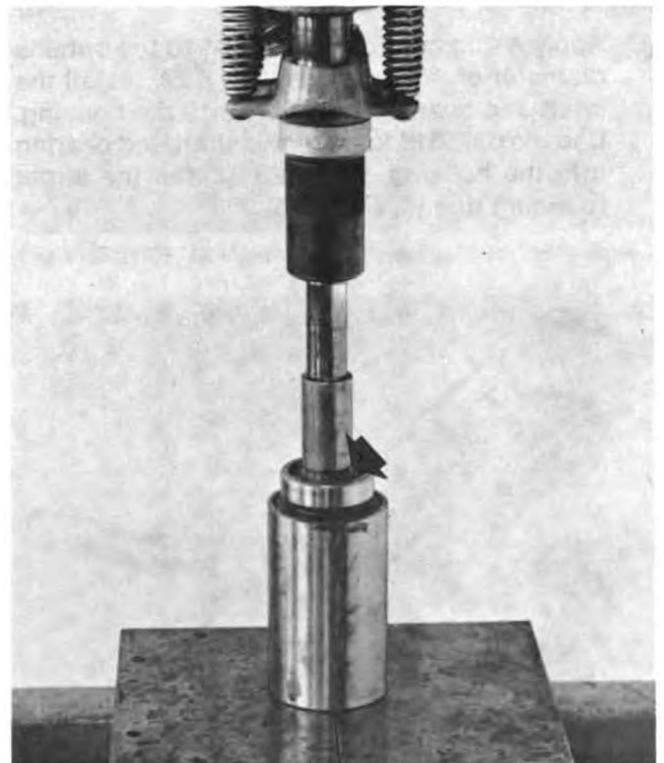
(N10868). Install The Shaft Into The Bearing.
